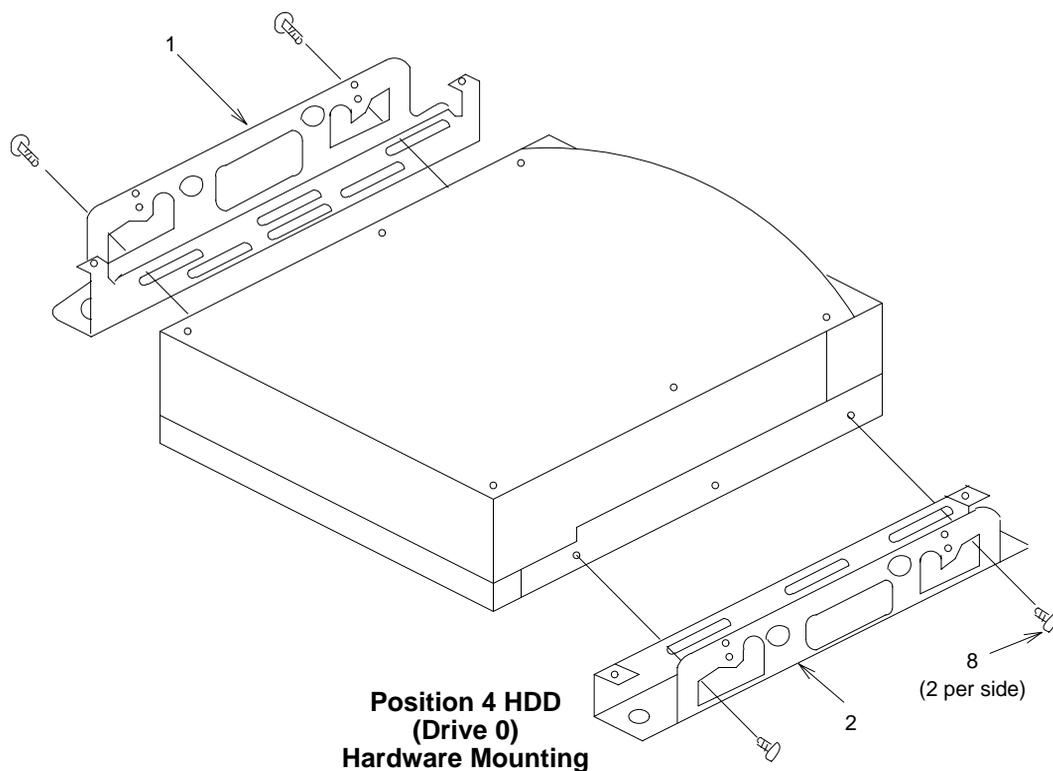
Position 4 Hard Disk Drive Mounting Kit
